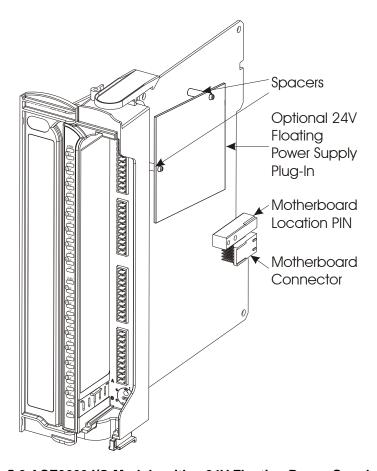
ACE3600 I/O Module with a 24V Floating Power Supply Plug-In
